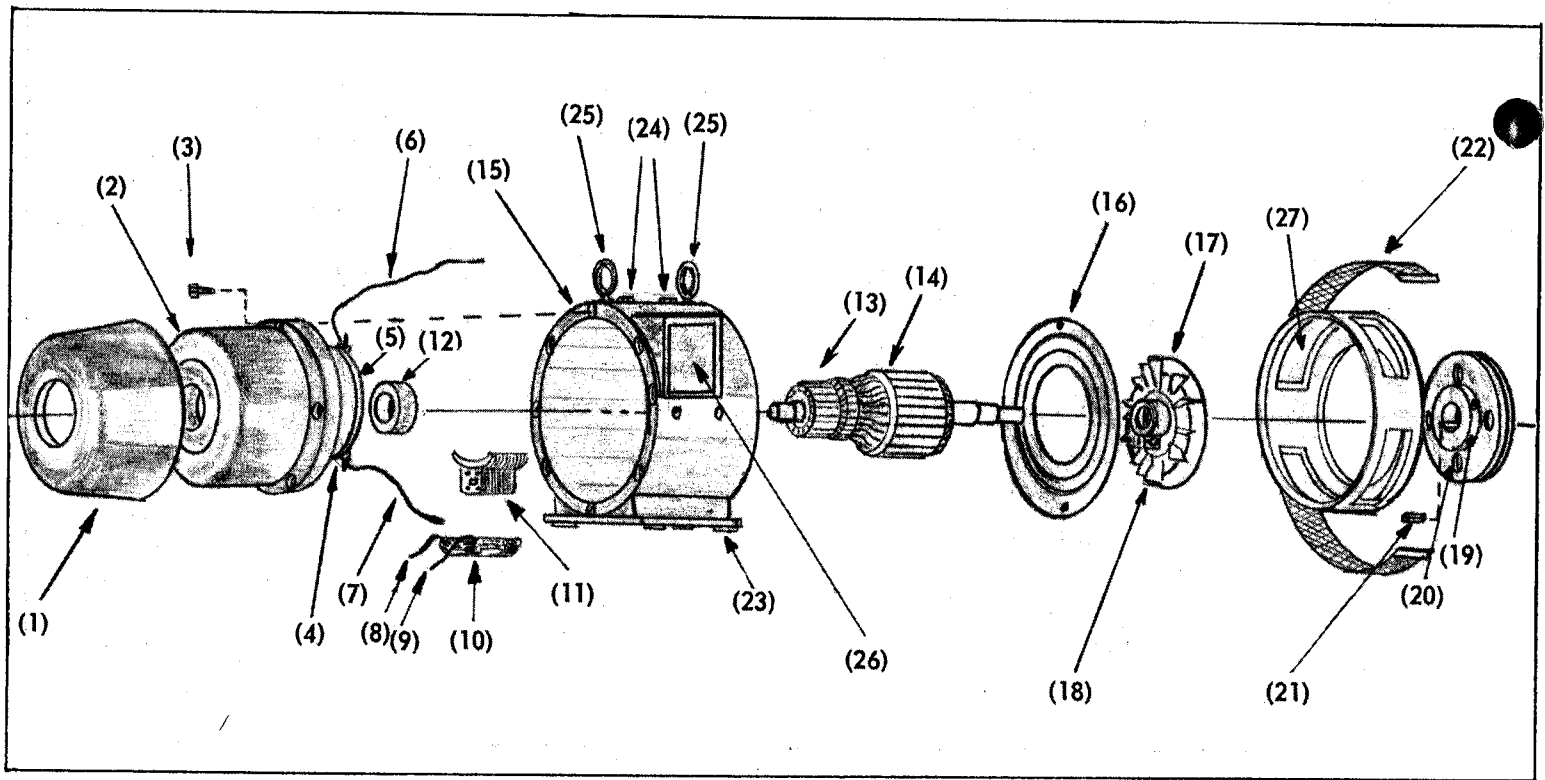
Parts Drawing, Typical Single Bearing DC Generator, Exploded View
